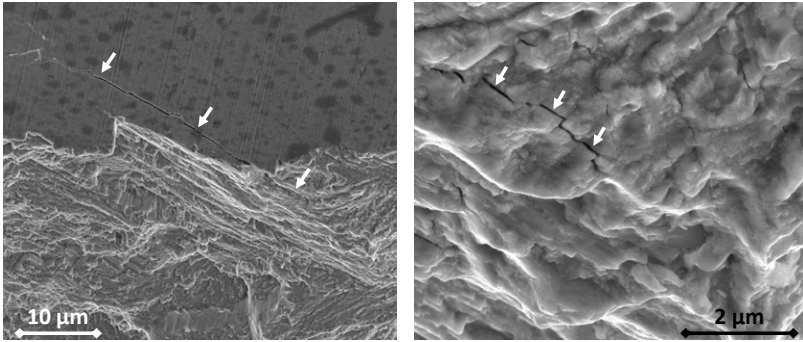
Oblique view in the loading direction: Secondary crack from figure 4.33 (marked by arrows) continues on the fracture surface. The magnification of the section on the fracture surface (Right) shows kinking and further microcracks in the vicinity.
